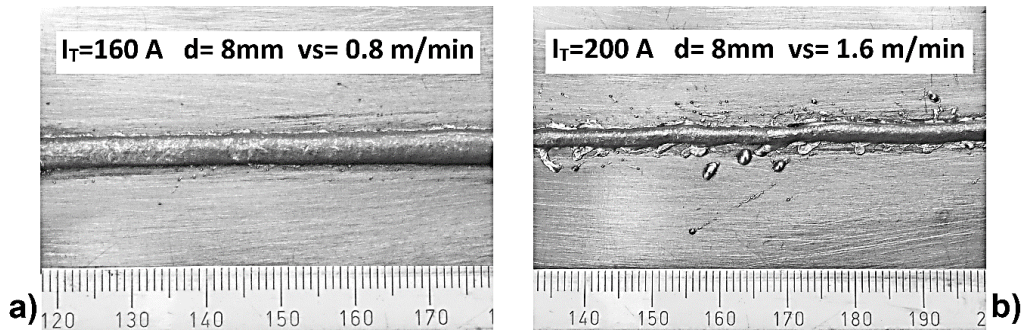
Macro images of weld beads. a) Exp09: Stable condition, b) Exp14: Unstable condition.
